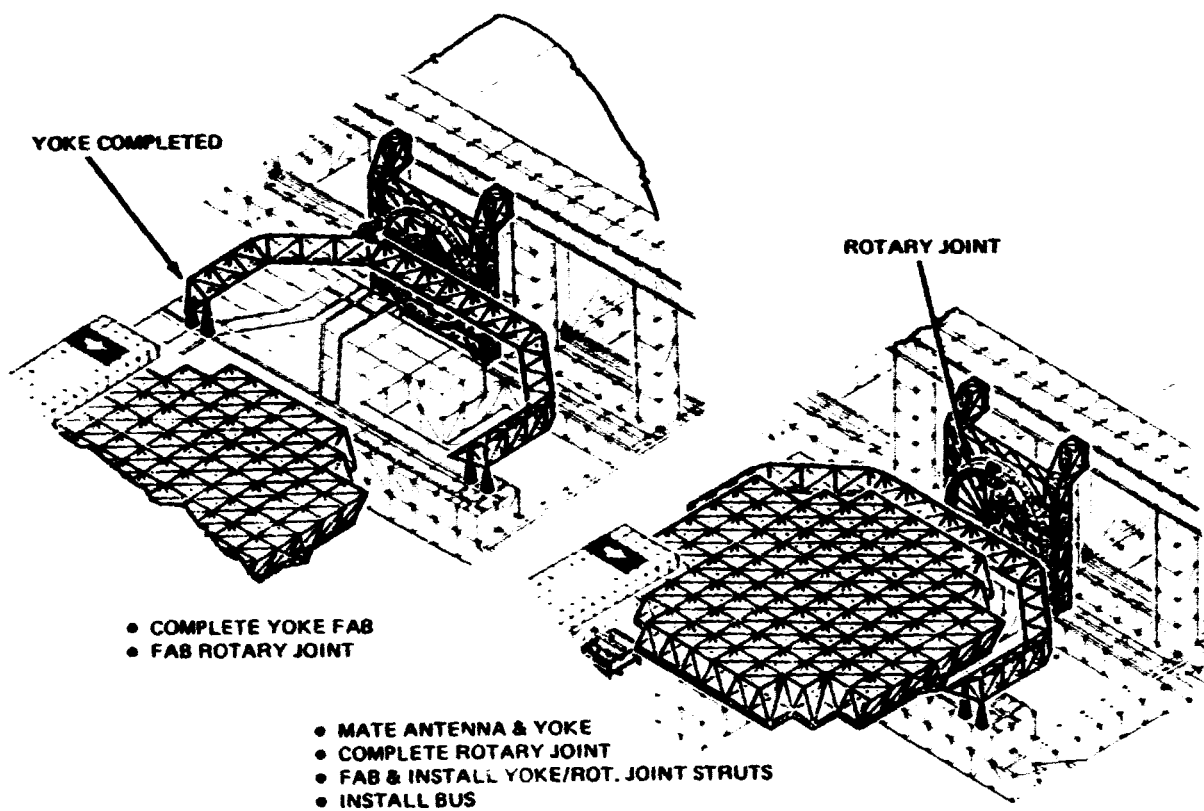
Yoke/Rotary Joint Assembly - Continued
